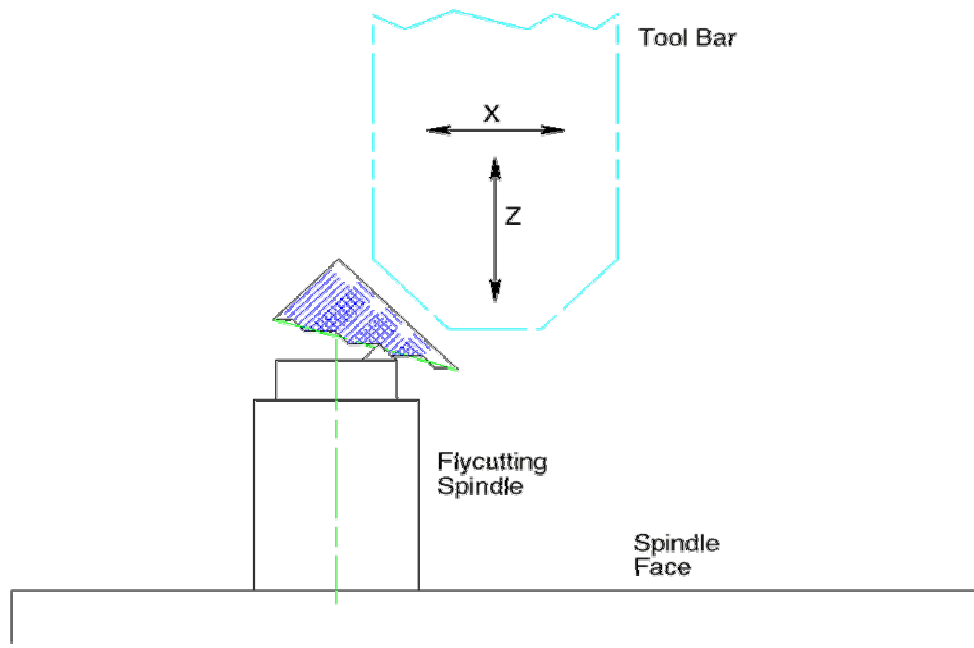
Here is more detail of the cutting process. The flycutting spindle moves along a circular path as the large spindle rotates back and forth. Fast compensation by toolbar motion in the x-direction keeps the grooves straight. To cut successive grooves the toolbar is stepwise incremented both in X and Z.
